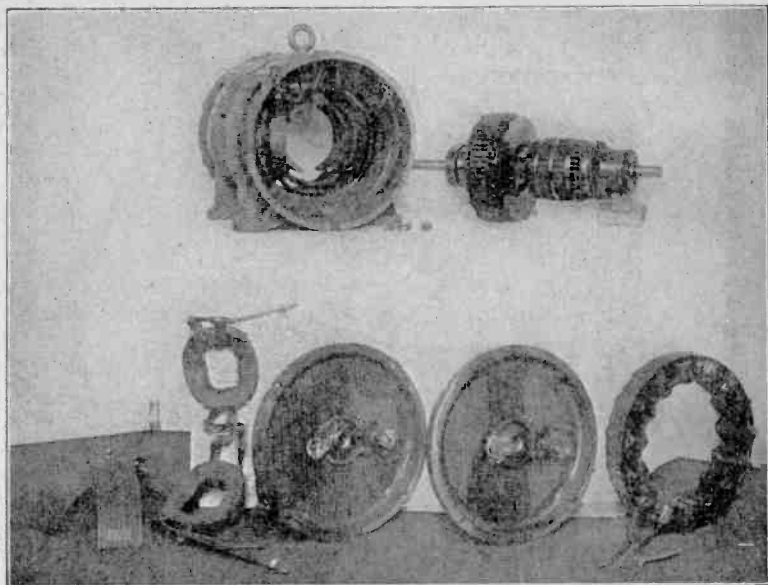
Exploded View of Crocker-Wheeler 2 KW. Motor Generator with Alternator of "Wound Type."
